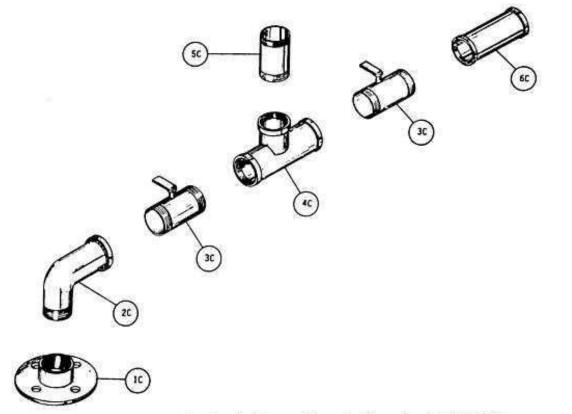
Exploded, schematic diagram of the carburcting unit and control valves.
